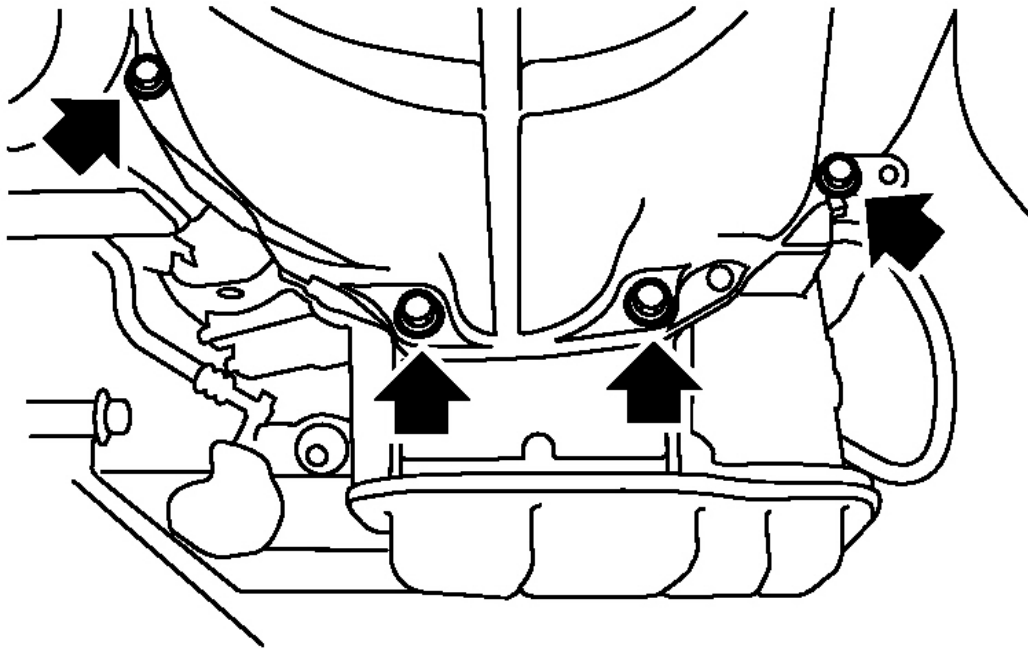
Removing Front Suspension Member Bolts And Nuts - Left Side
